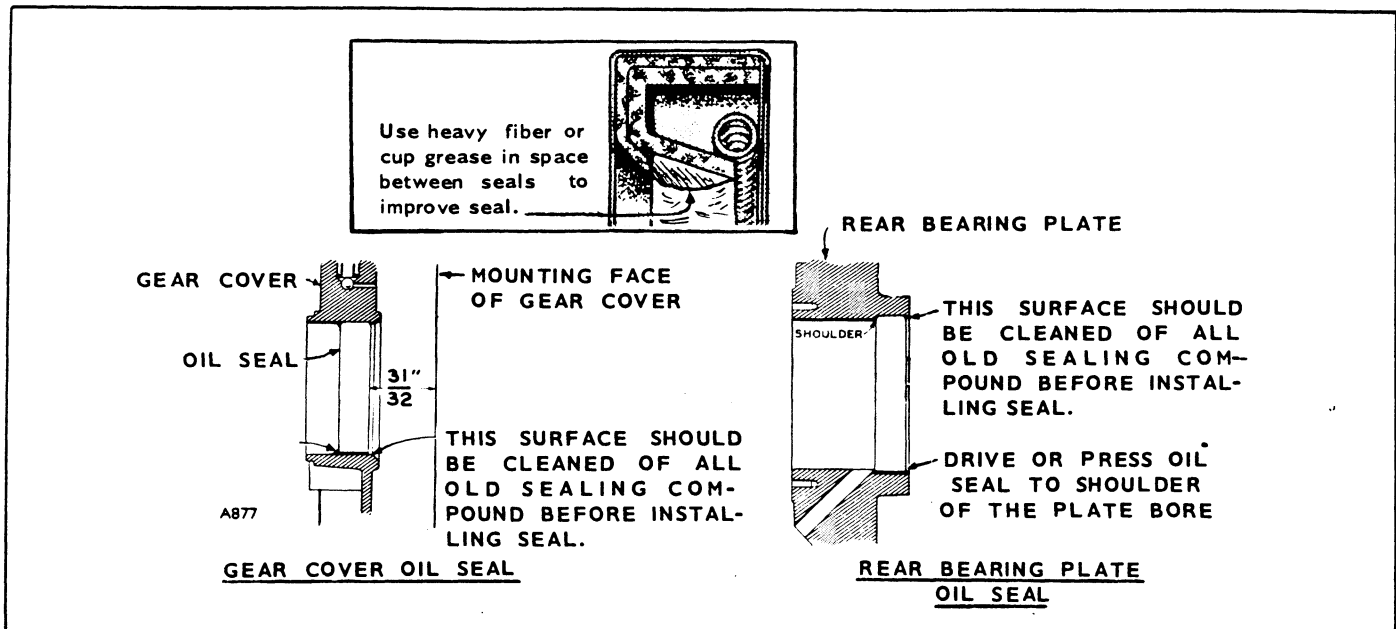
GEAR COVER AND REAR BEARING PLATE OIL SEALS
